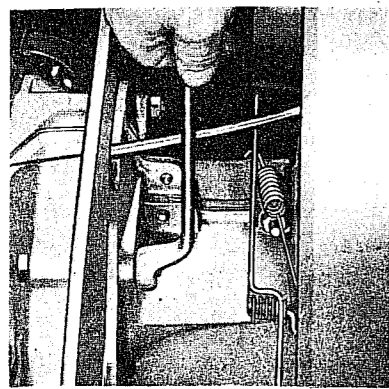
Removing the engine upper mounting bolts - 17mm. (1300 & 1600cc. have a captive nut here).
